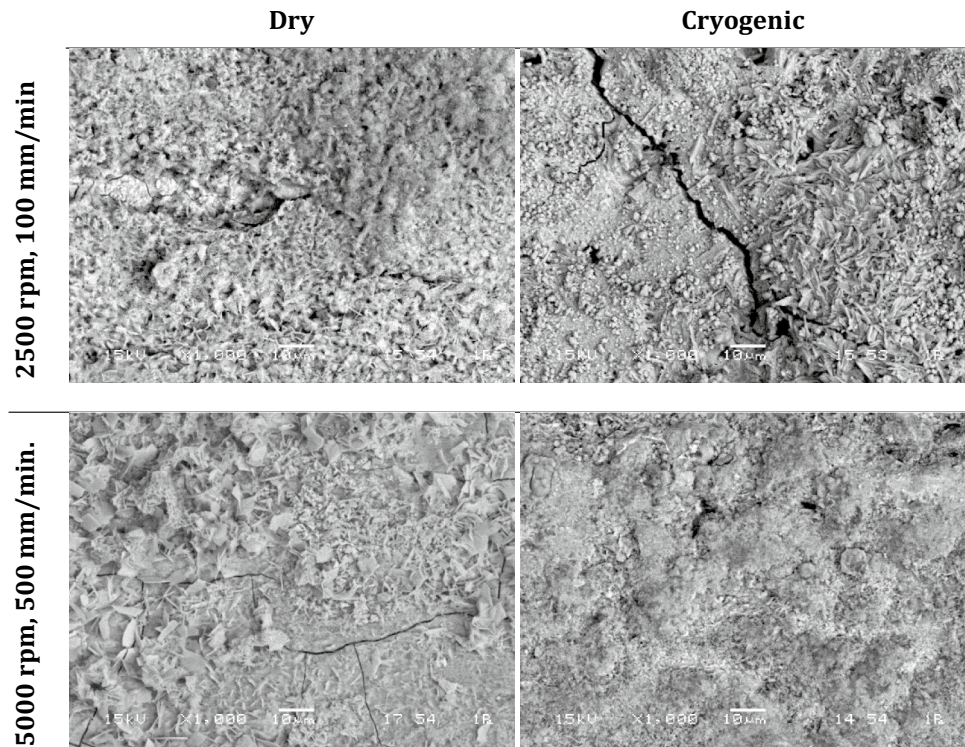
Corroded surface of 100 mm/min—2500 rpm (dry drilling)
